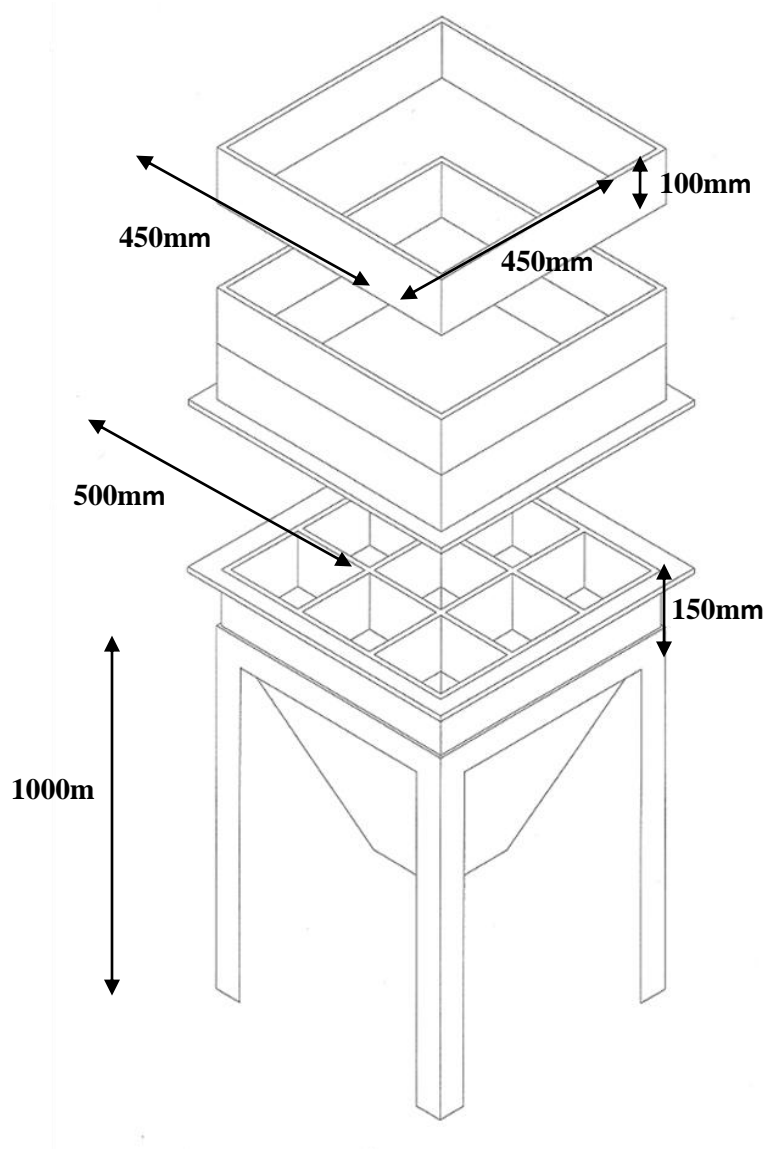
Exploded View of the Arrangement of the Fluidised Bed (Air Distributor Not Shown)
